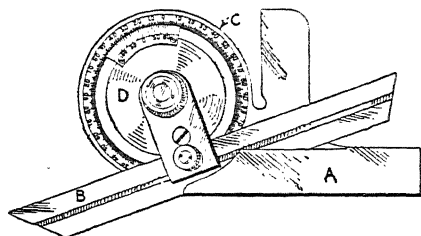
Brown & Sharpe bevel protractor. The vernier reading of this protractor is explained in the Appendix, page 361.
